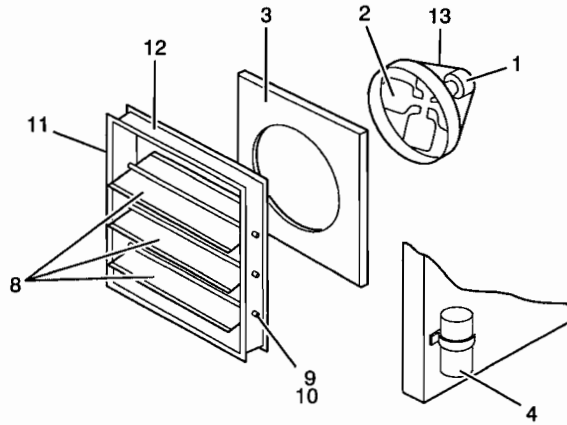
POWER EXHAUST SECTION - SEE PG. 12
